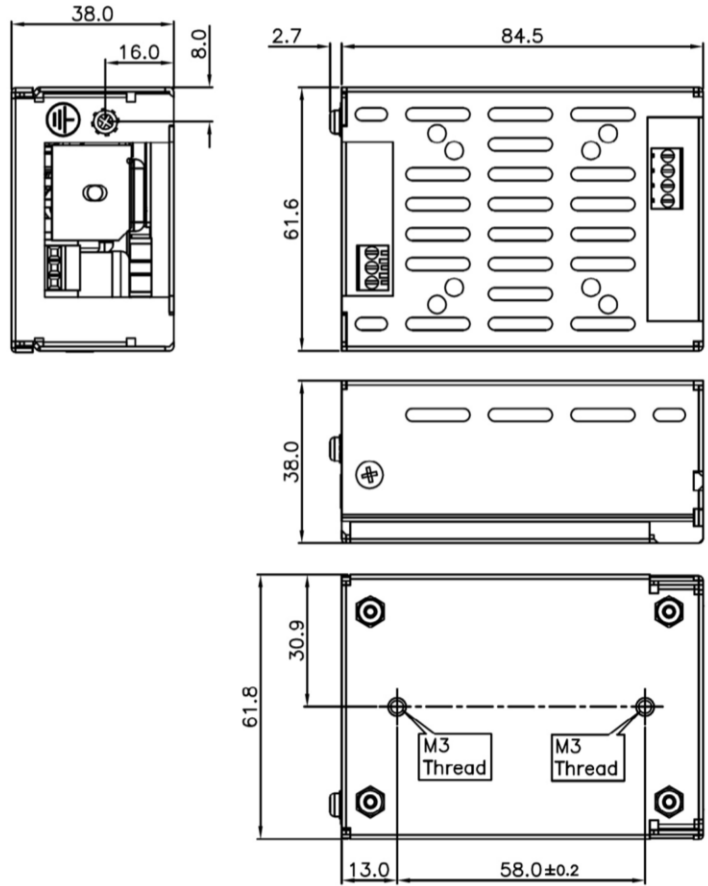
Mechanical Drawing - Molex Header (Option 2)
